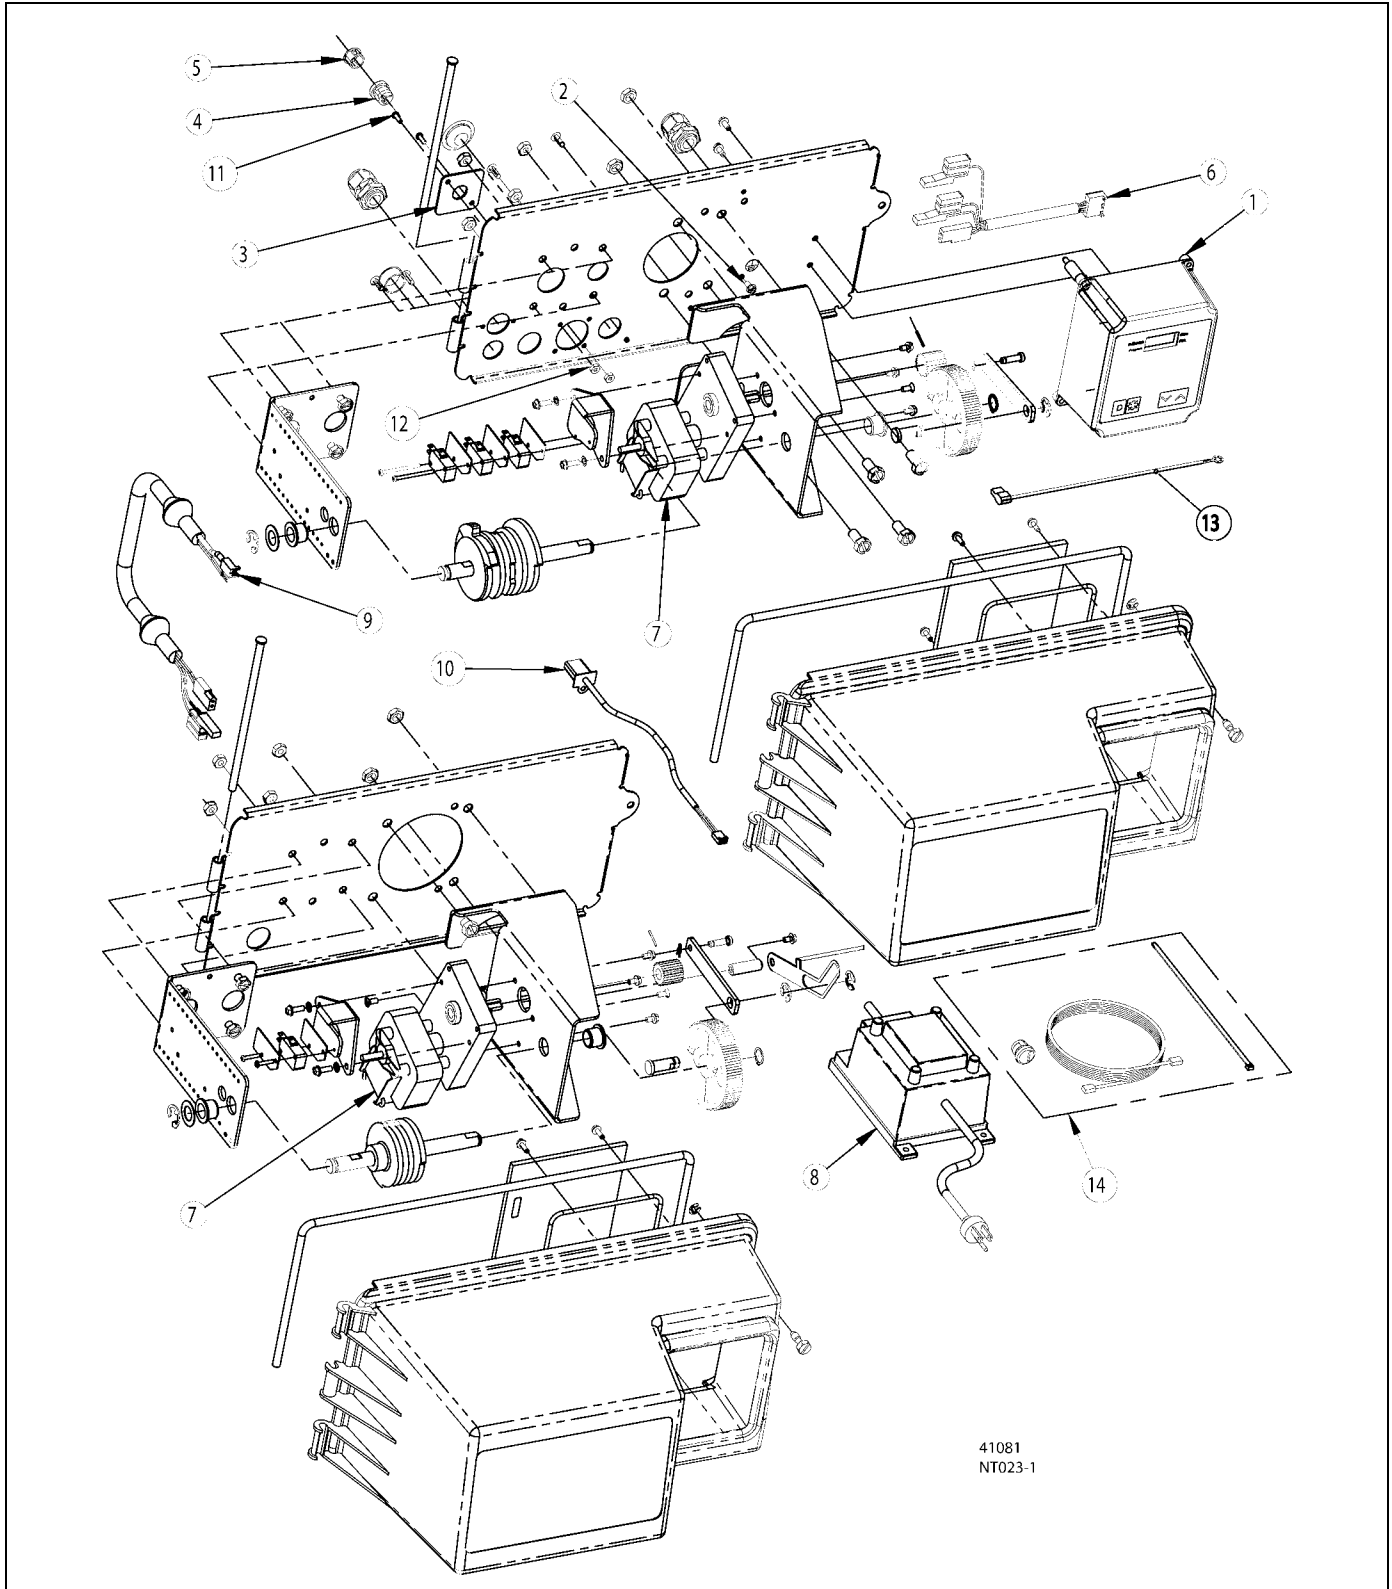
3150/3900 Upper Drive and Lower Drive Power Head Assembly
